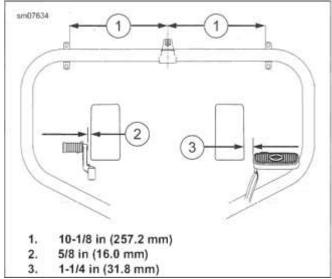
Lower Fairing Mounting Dimensions REMOVE AND INSTALL: TWIN-COOLED
